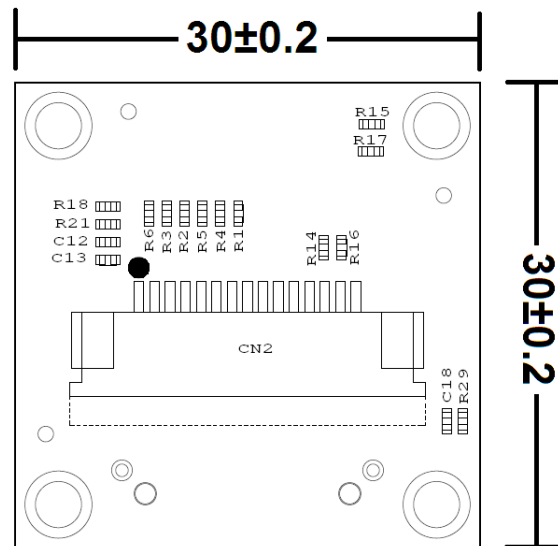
Rear View of e-CAM24_CUNX Adaptor Board Mechanical Dimensions
